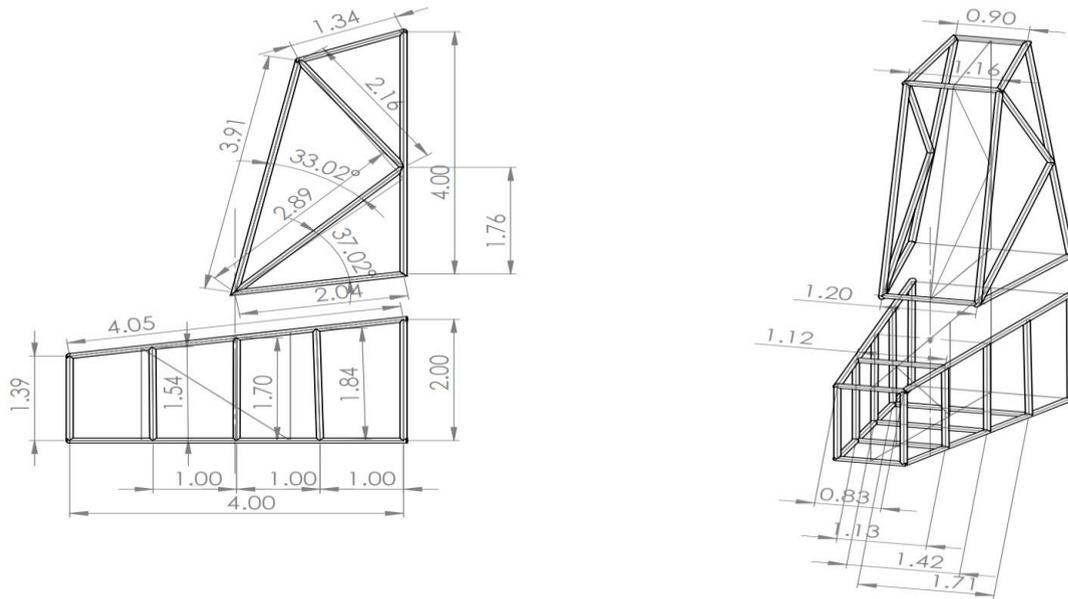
(a) Side view of the Frame; (b) Isometric view of the Frame
